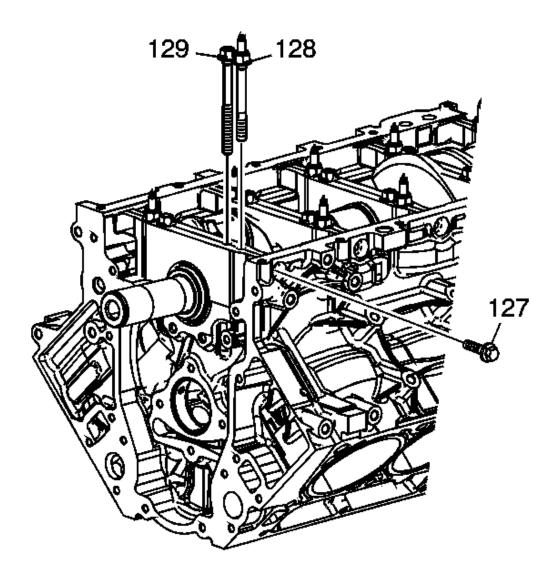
Identifying Bearing Cap Bolts & Studs Courtesy of GENERAL MOTORS CORP.
